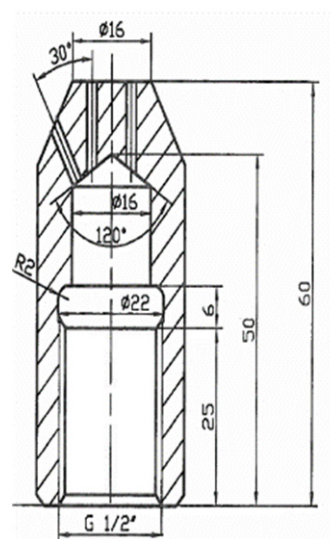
Schematic drawing of the burner's nozzles. Dimensions marked with an asterisk (*) are for reference only.
